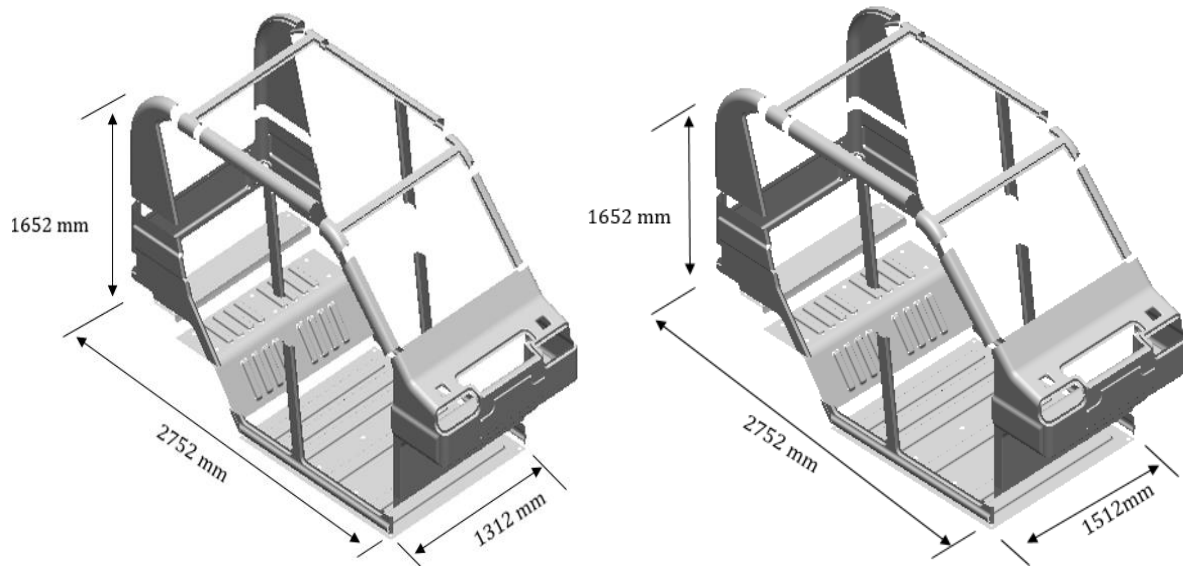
shows the exploded view two-dimensionally models of Bajaj Qute structure
